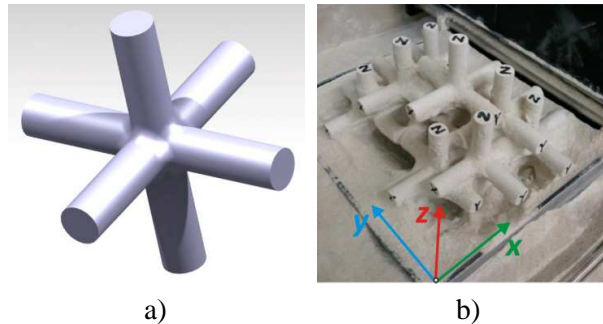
a) 3D CAD geometry of 3DP test part, b) depowdering of unused building material in working chamber of 3DP machine with associated orientations and designations of test samples
